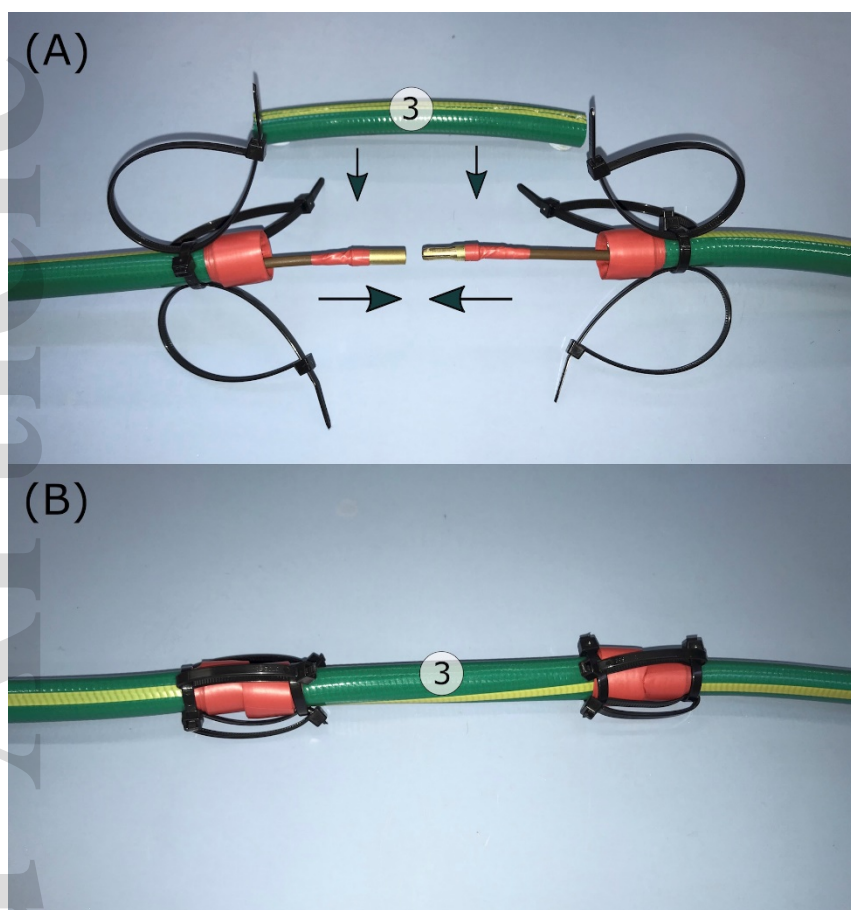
Photograph of the breakaway plug assembly (A) separated and (B) assembled and ready for deployment.
